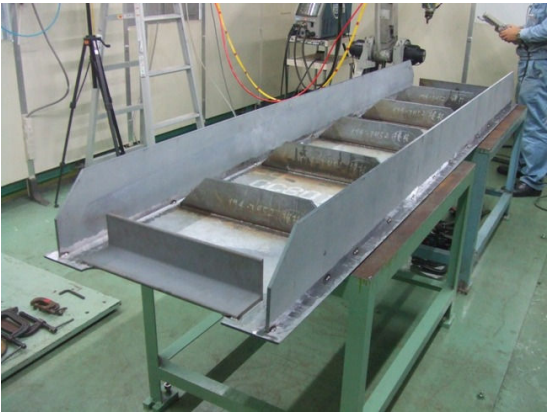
Laser arc hybrid welded panel for actual bridge
